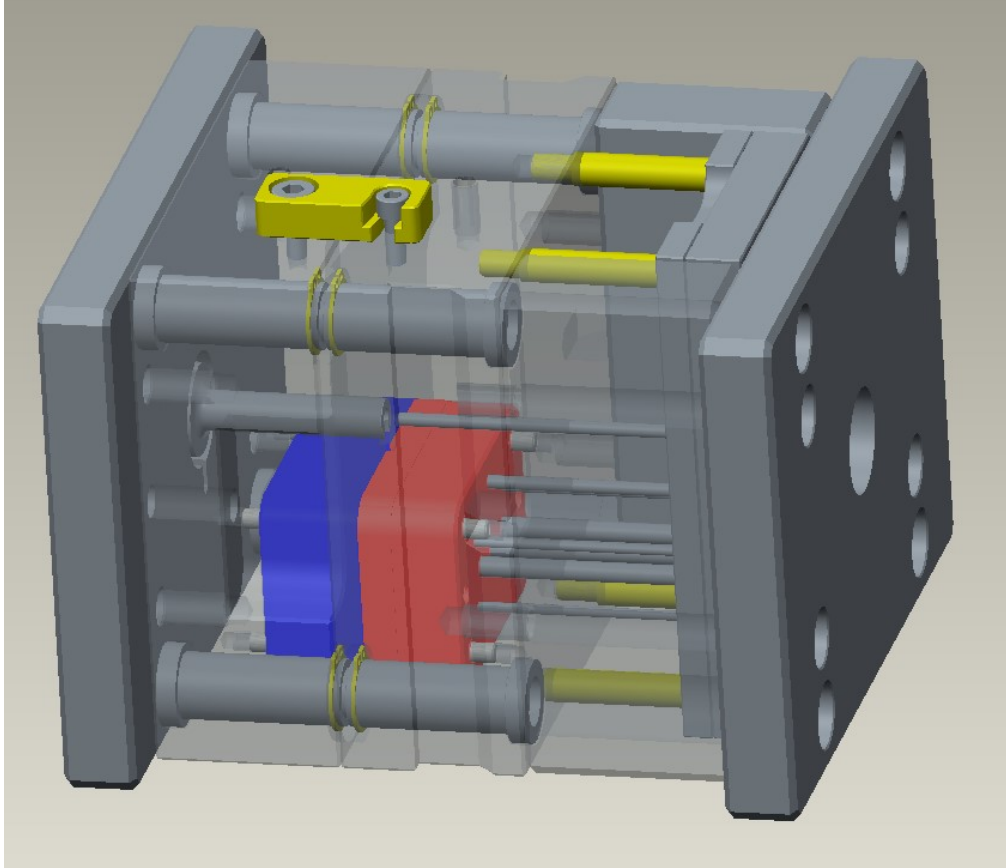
The first 3D model of the mold. The red and blue parts represent the inserts.
